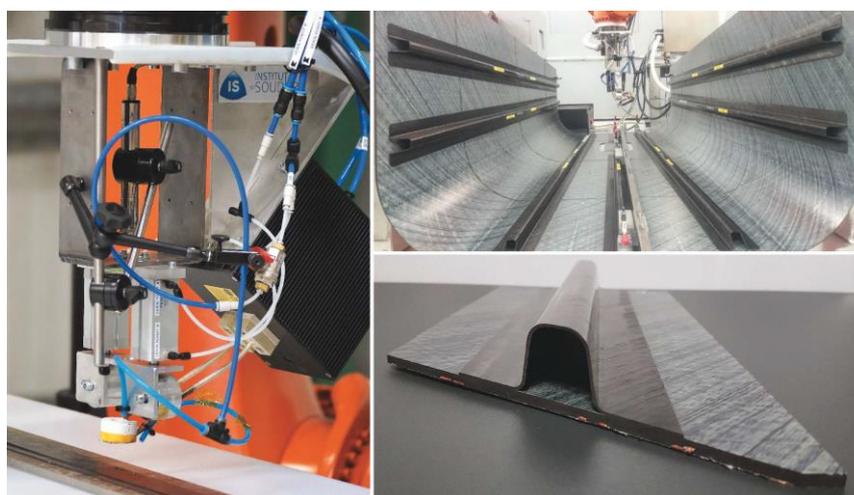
Stelia Aerospace technologies: automated laying, welding
